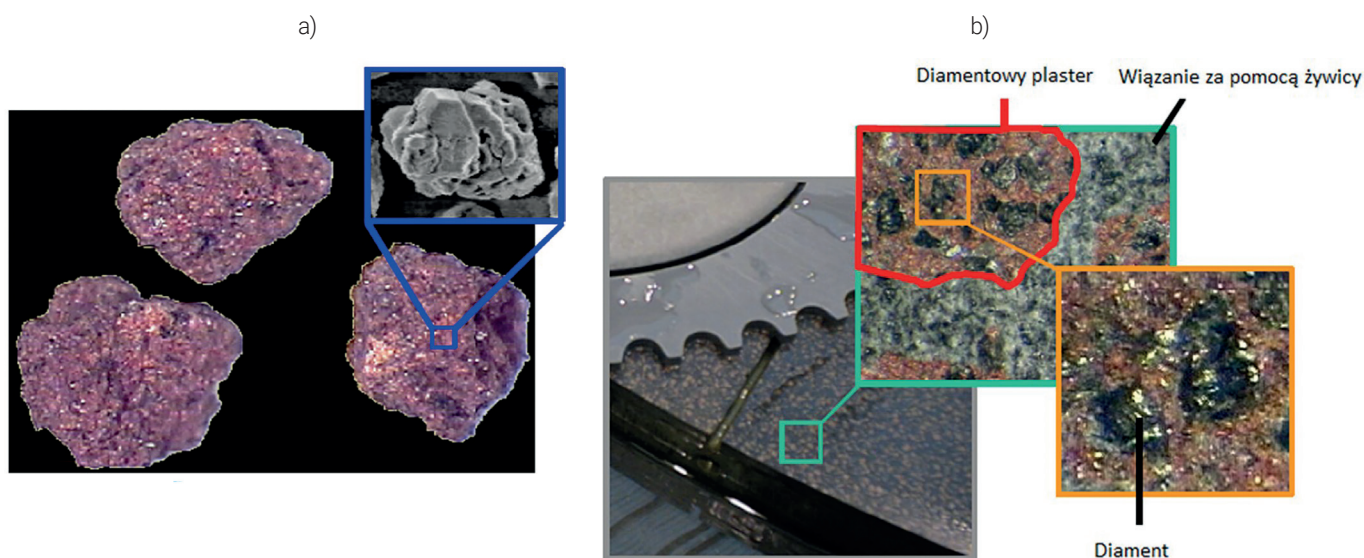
Abrasive disc tools: a) diamond aggregate, b) structure of grinding wheels (Peter Wolters) [1]
